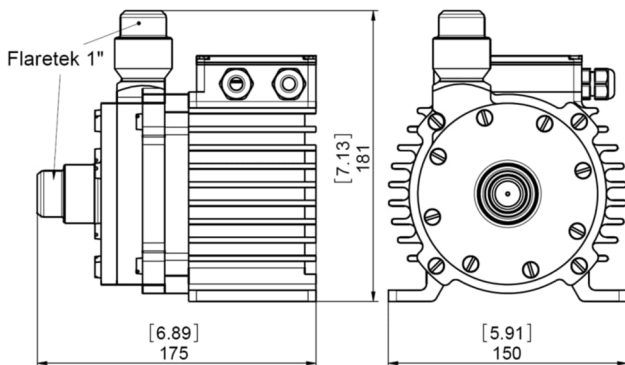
Basic dimensions of motor LPM-600.2 with pump head LPP-300.1
